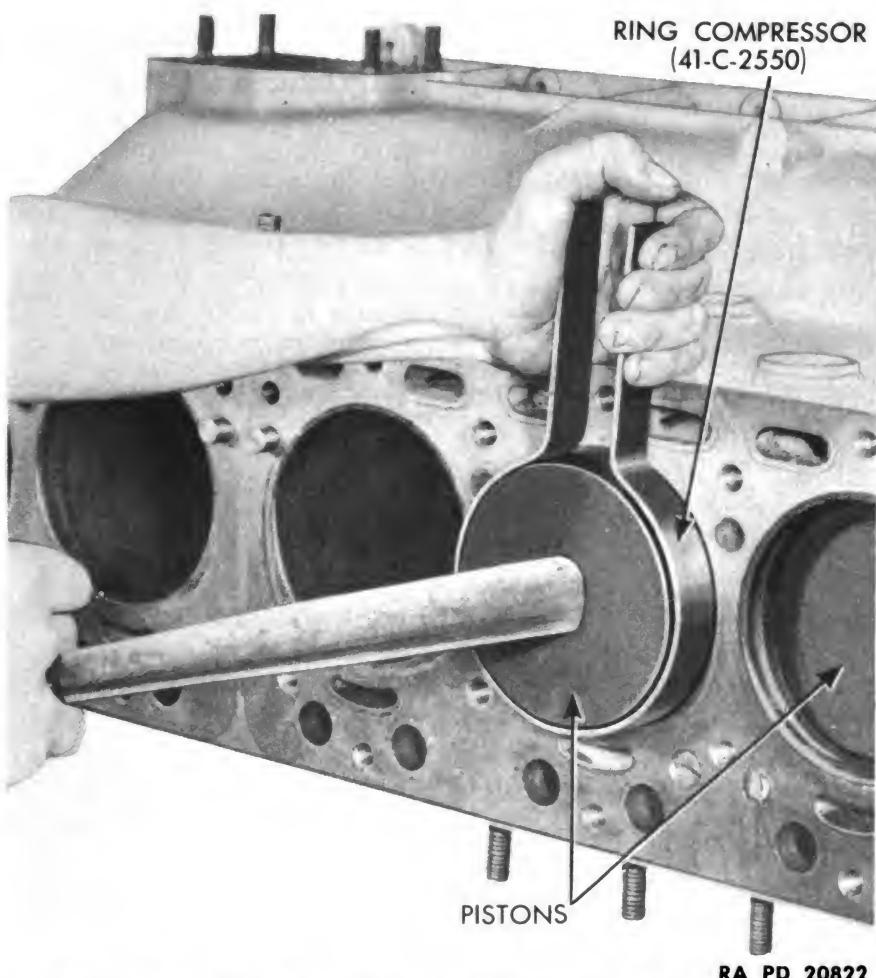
Installing Piston and Connecting Rod Assembly Using Ring Compressor
